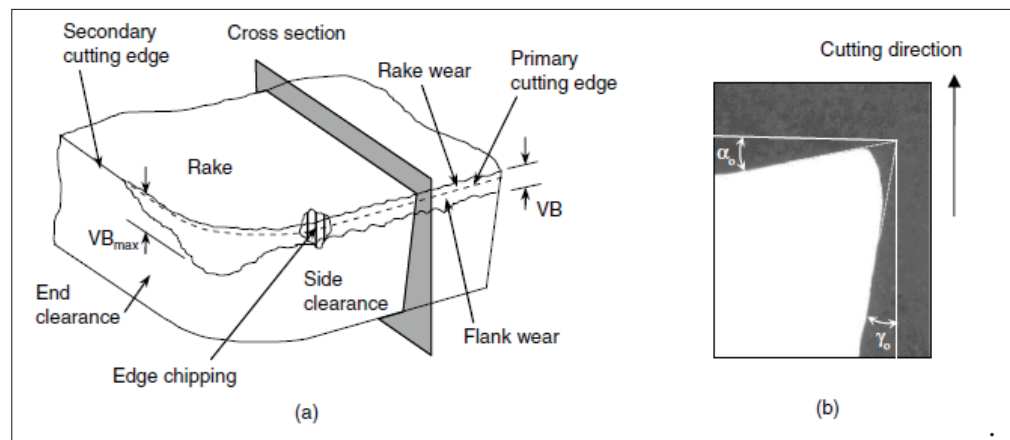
Types of tool wear in machining CFRP (a), and cross section of a replica of the cutting edge (b) – adapted from (Sheikh-Ahmad, 2009)
